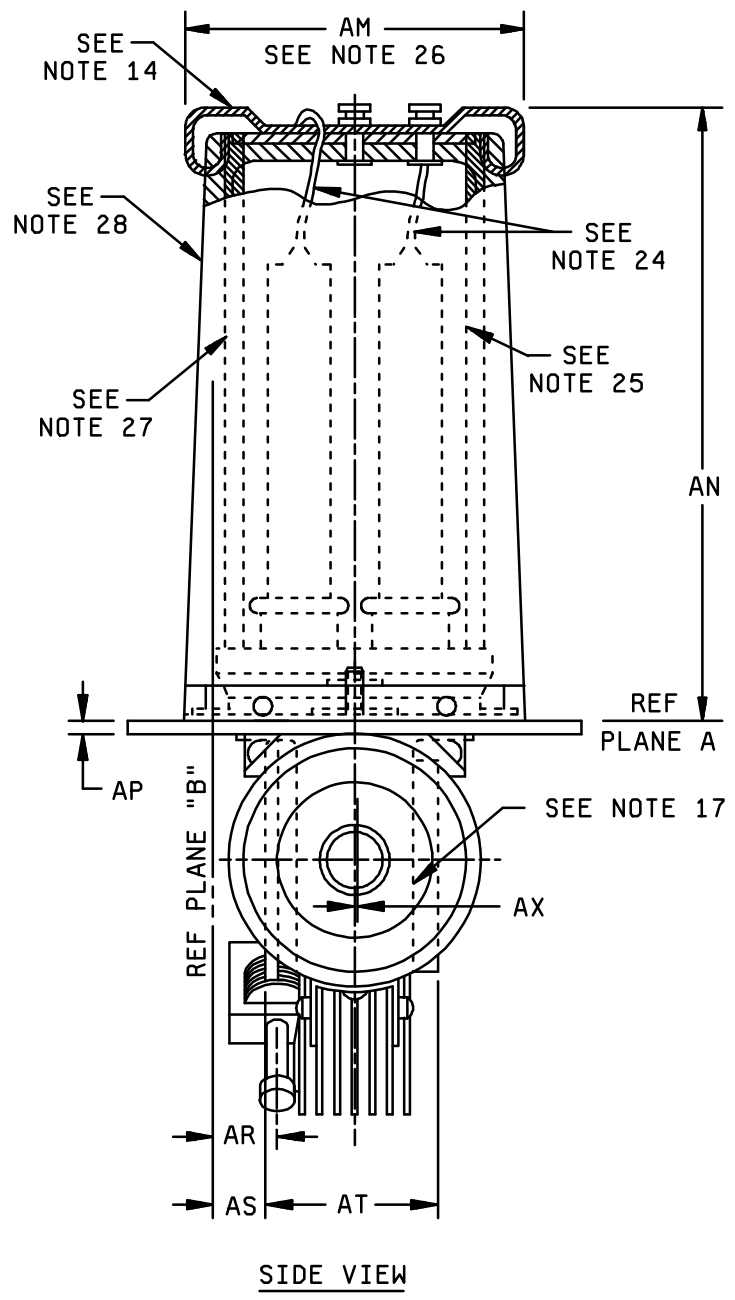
Outline drawing of electron tube types 5586 and 5657 - Continued.
